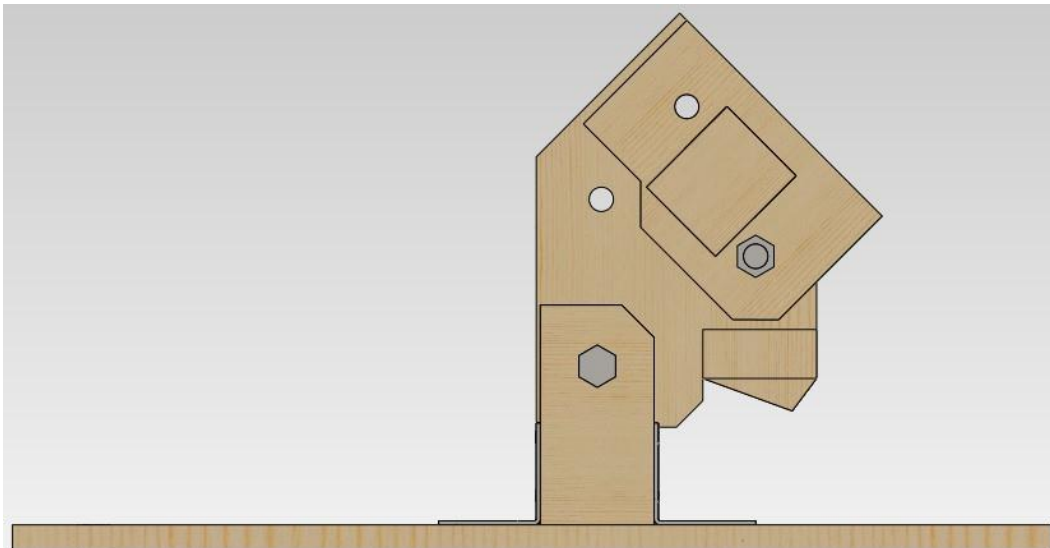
Side view of the reaction force tester with some parts removed for clarity.
